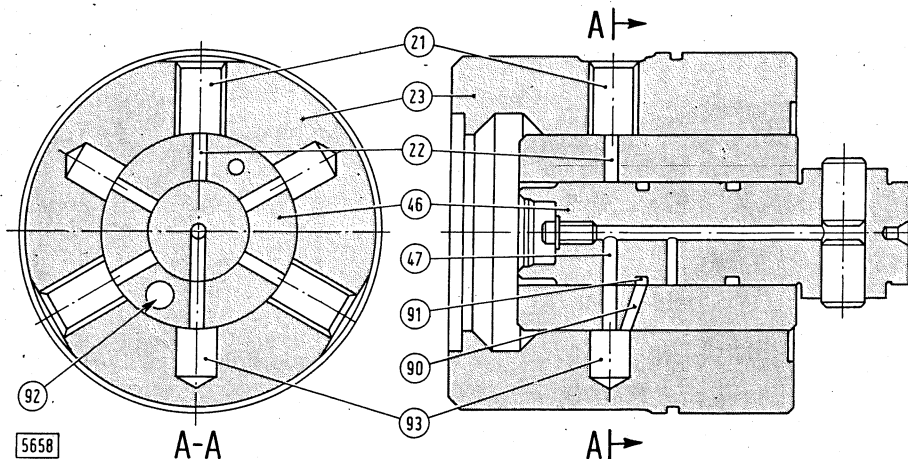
Cross-sectional views of hydraulic head (23) and rotor (46).
